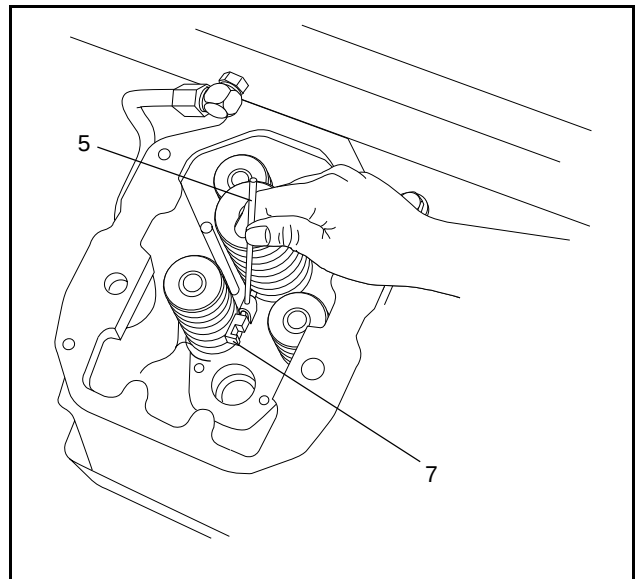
Typical Example Of Gauge In Position On Injector Rack (Rocker Shaft Removed For Illustration)
